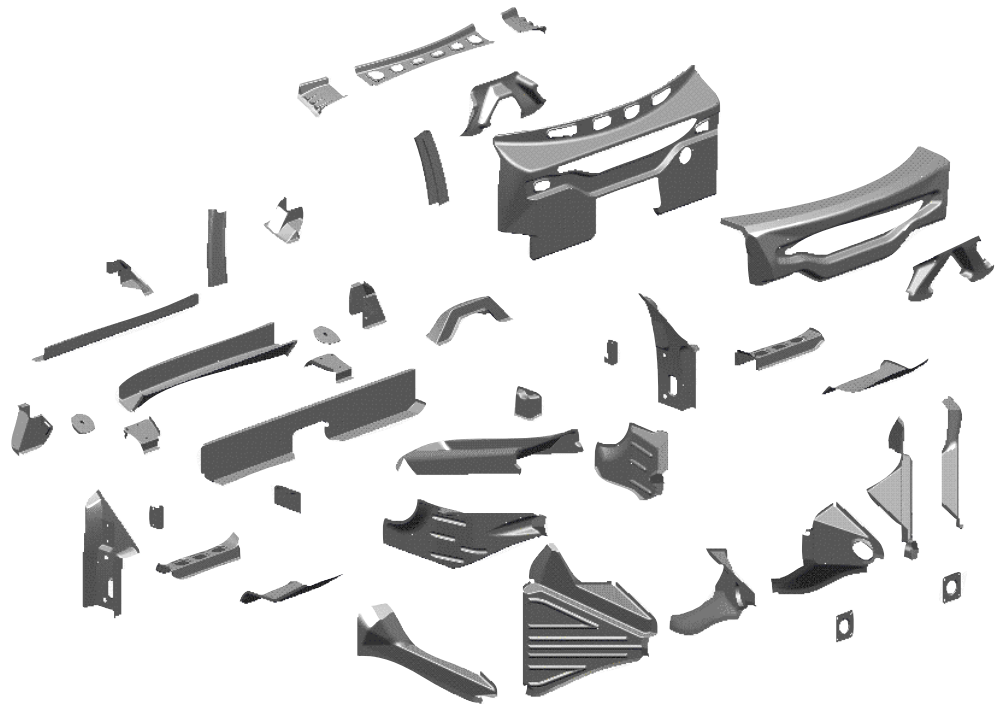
ULSAB-AVC common parts (C-Class & PNGV-Class) exploded view
